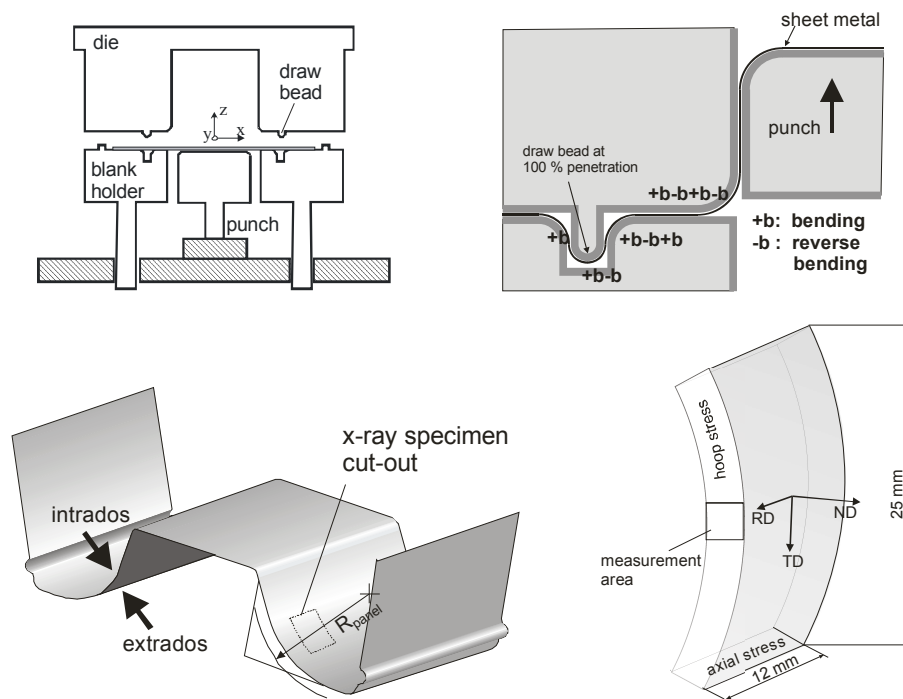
Top, left: setup of the channel draw process [1,6], sequences of bending and reverse bending (top, right). Bottom, left: final specimen with the X-ray sample cut-out (right, enlarged).
